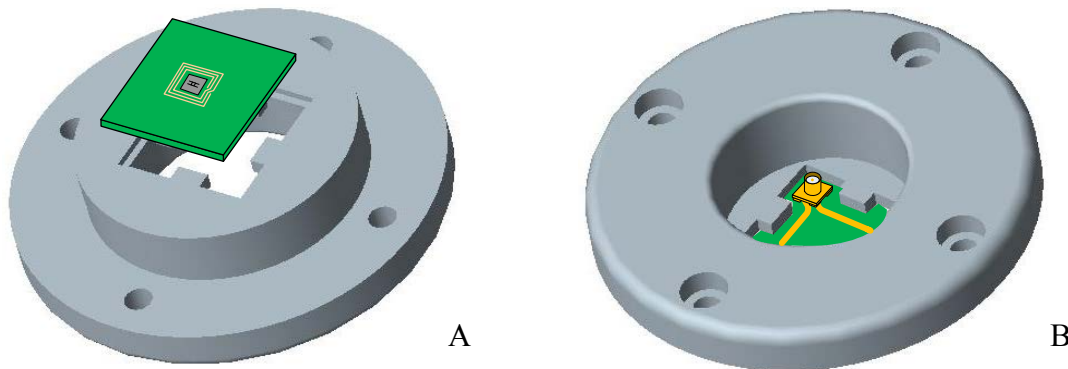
Wireless sensor boards flush mounted in test plugs used for the flow cell calibration and wind tunnel tests. A) Frontside showing sensor being fit into the plug. B) Backside view showing antenna and RF connector.
